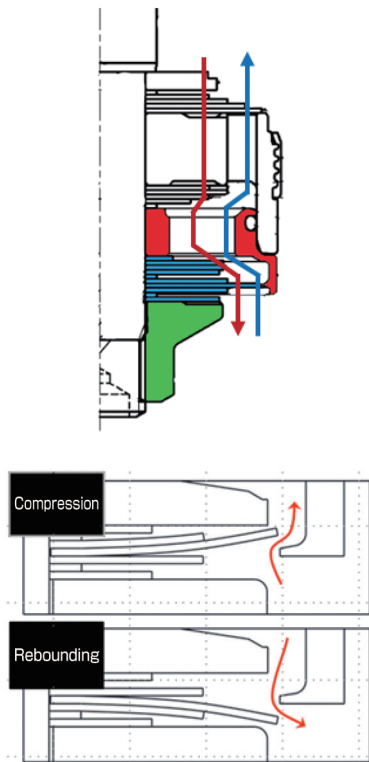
Swing valve structure for four-wheel cars<sup>2)</sup>
